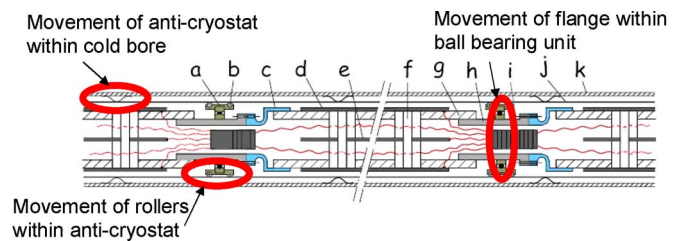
Schematic assembly of a portion of the long shaft showing the main components: (a) ball bearing, (b) bronze cage with roller, (c) Ti-bellow, (d) tangential coil, (e) central coil, (f) dowel pin, (g) ceramic support, (h) SiN flange, (i) cable connector, (j) anti-cryostat, (k) cold bore. Possible sources of vibration are circled.
